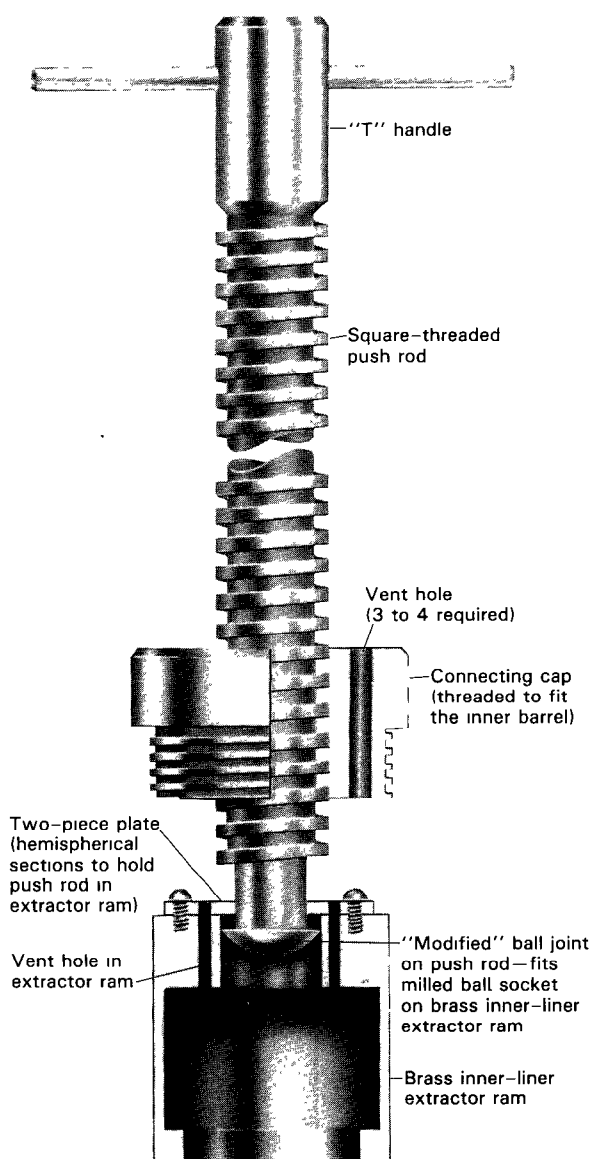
Denison sampler and core-barrel brass inner-liner extruding assembly.
